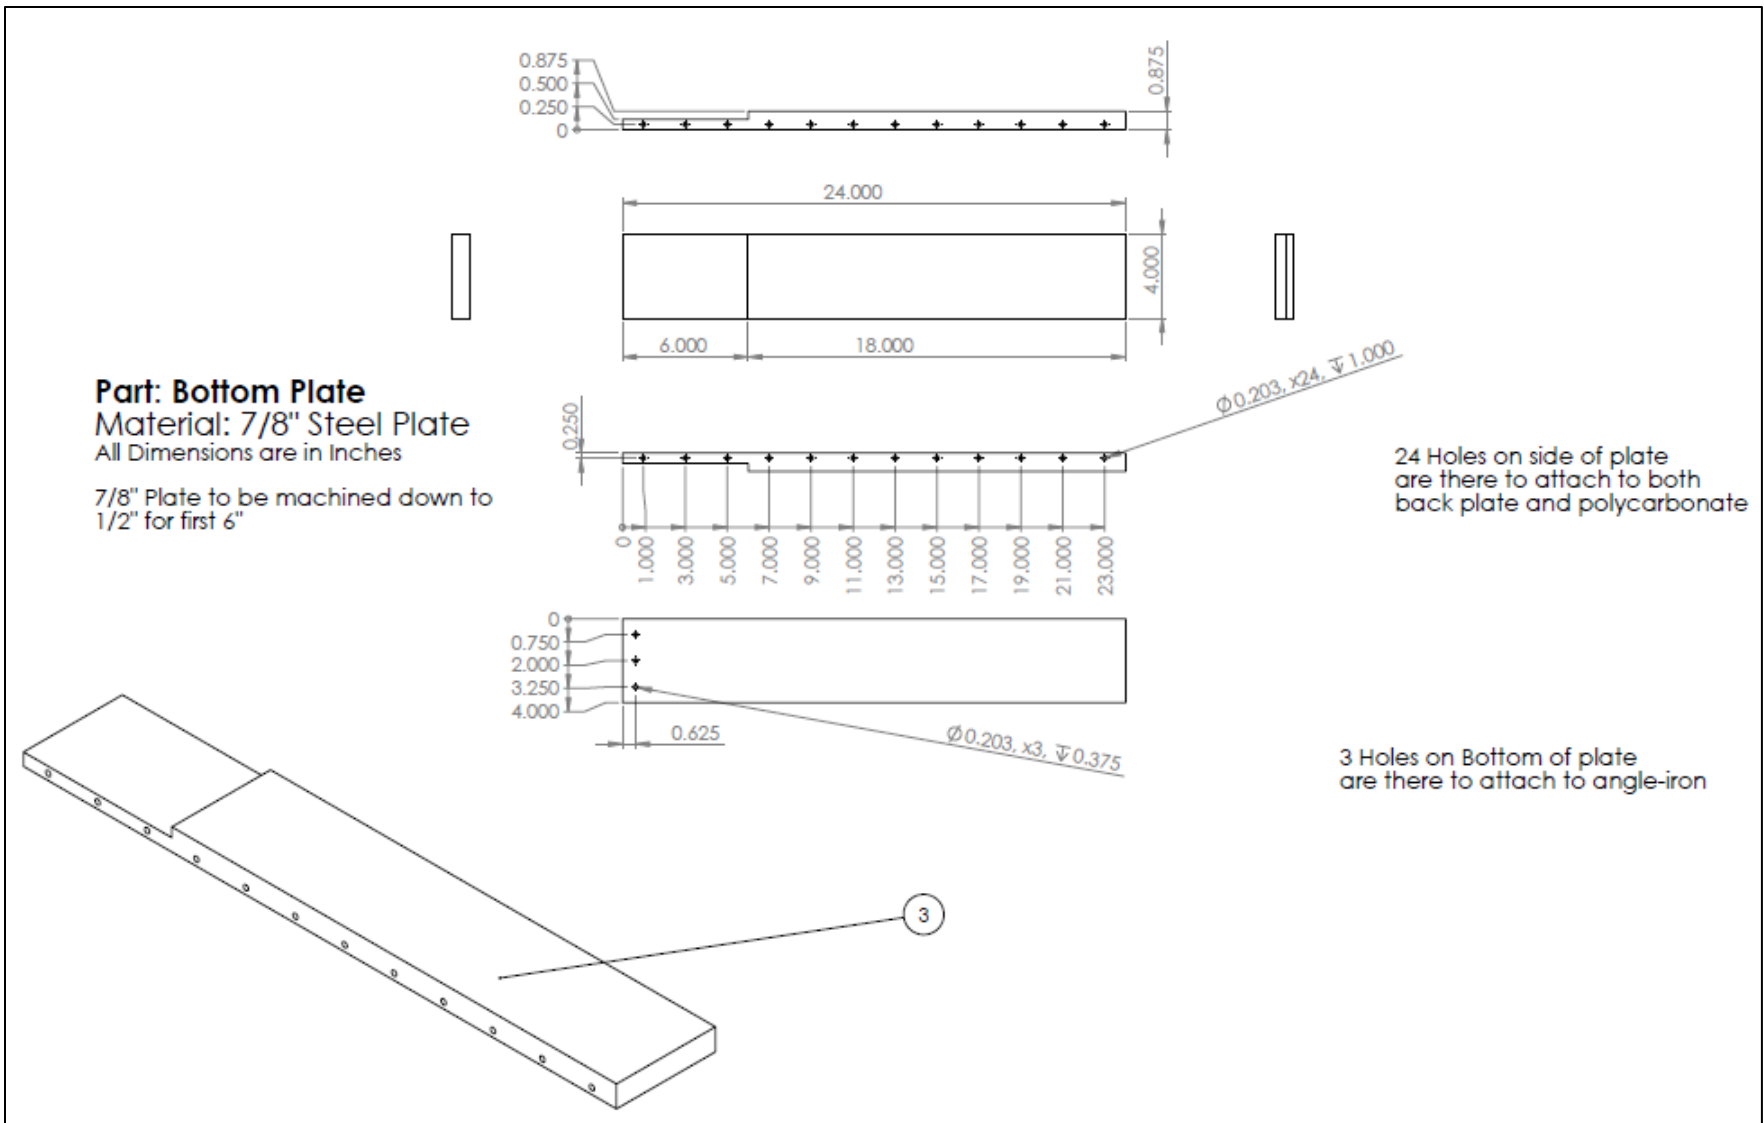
Final Bottom Plate Design Technical Drawing for Cavitation Tunnel
